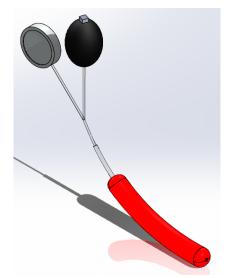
An isometric view of the complete rescue device assembly. The main body tubing, the balloon body,the inflation bulb and a pre-purchased pressure gauge are shown. The device will be assembled using medical grade UV sealant.
